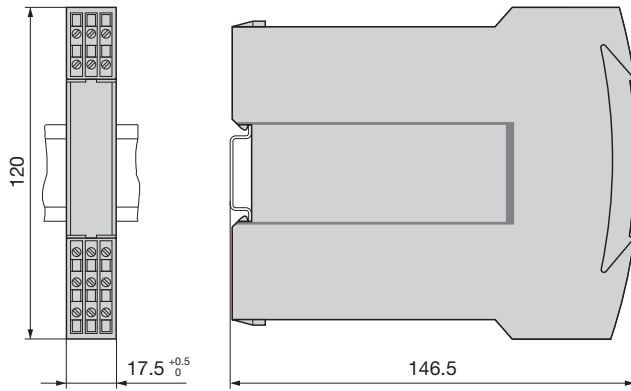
SINEAX C 402-1 in housing S17 clipped onto a top-hat rail (35 x 15 mm or 35 x 7.5 mm, acc. to EN 50 022).
